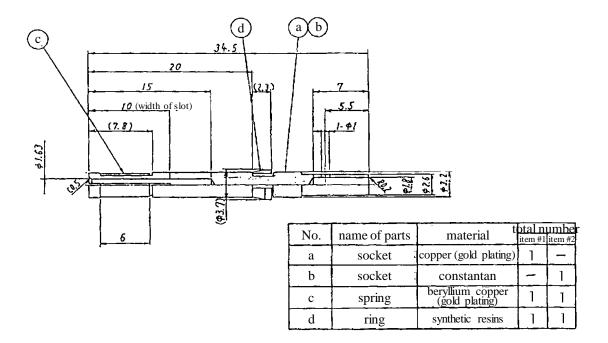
Thermocouple Socket Contact (manufactured by Hitachi Power Semiconductor Device, Ltd.)
